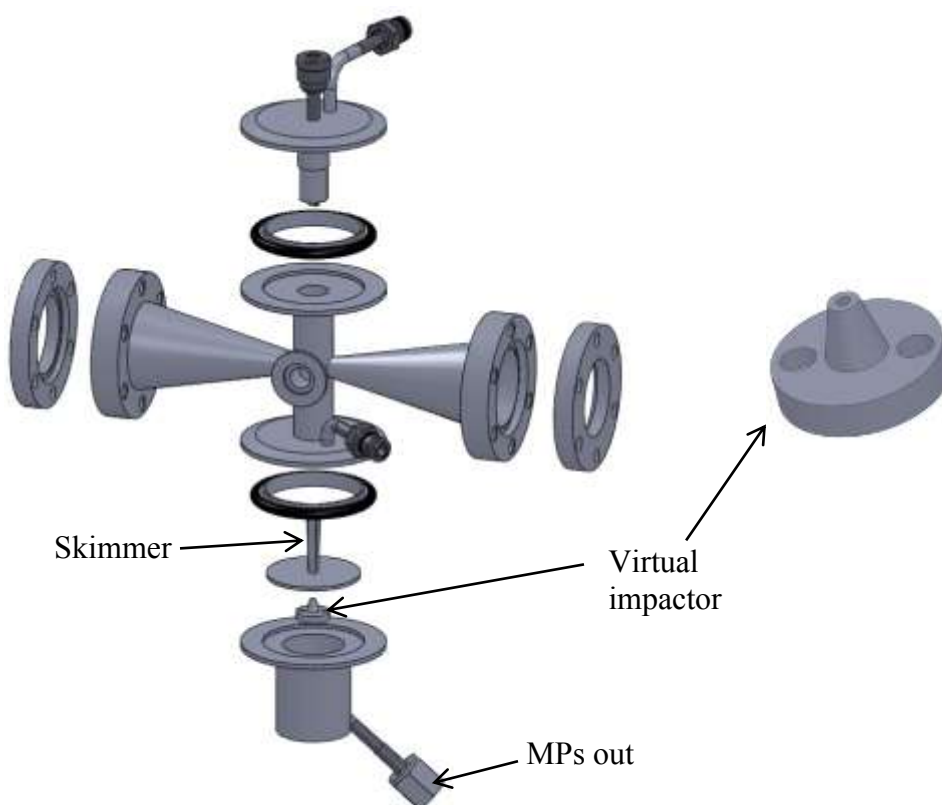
Skimmer and virtual impactor assembly. Reprinted from Ref. 66.
